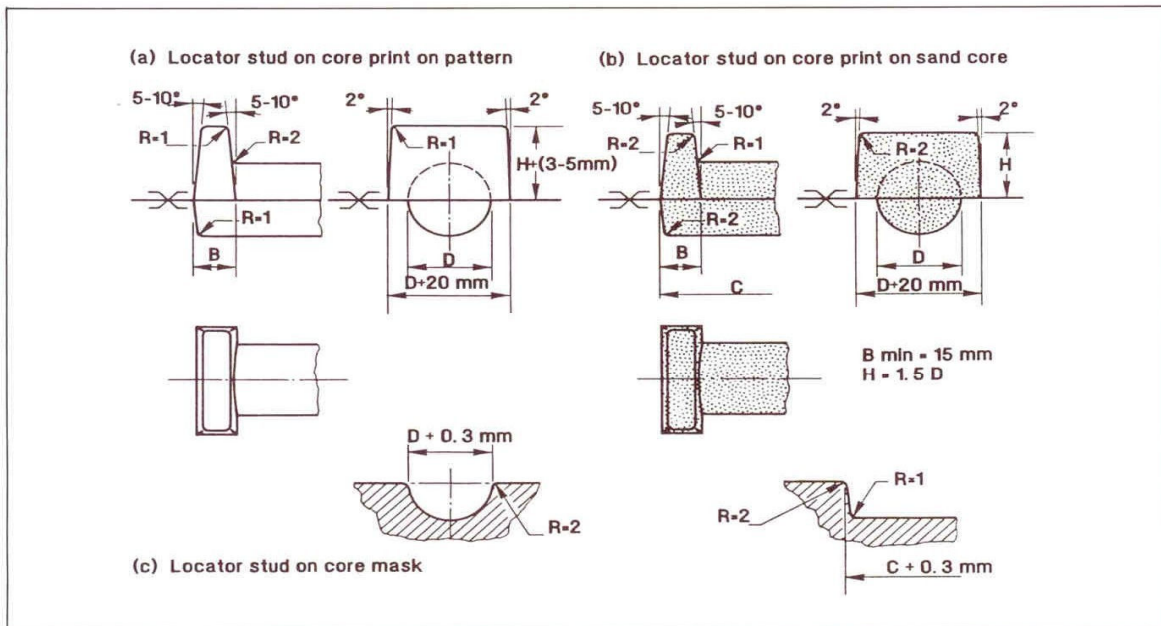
Dimensional tolerances for locator which can be applied in most cases. On this sketch the clamping surfaces are crush-fitted, and the supporting ones are size-to-size. However, for heavier cores an opposite system may be applied.
